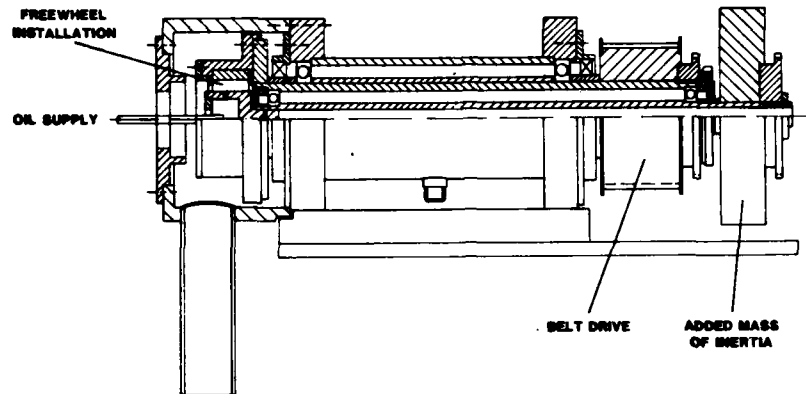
TEST RIG FOR INVESTIGATION OF THE ENGAGING BEHAVIOUR OF FREEWHEEL CLUTCHES
